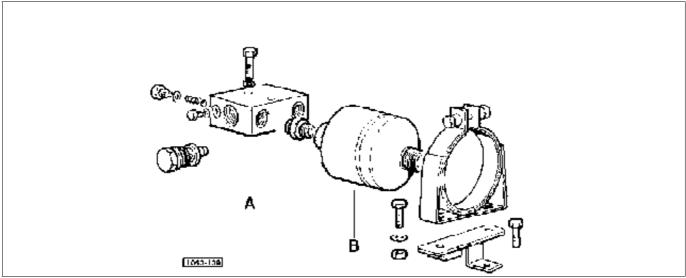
Damping unit parts. A - anti-shock valve
